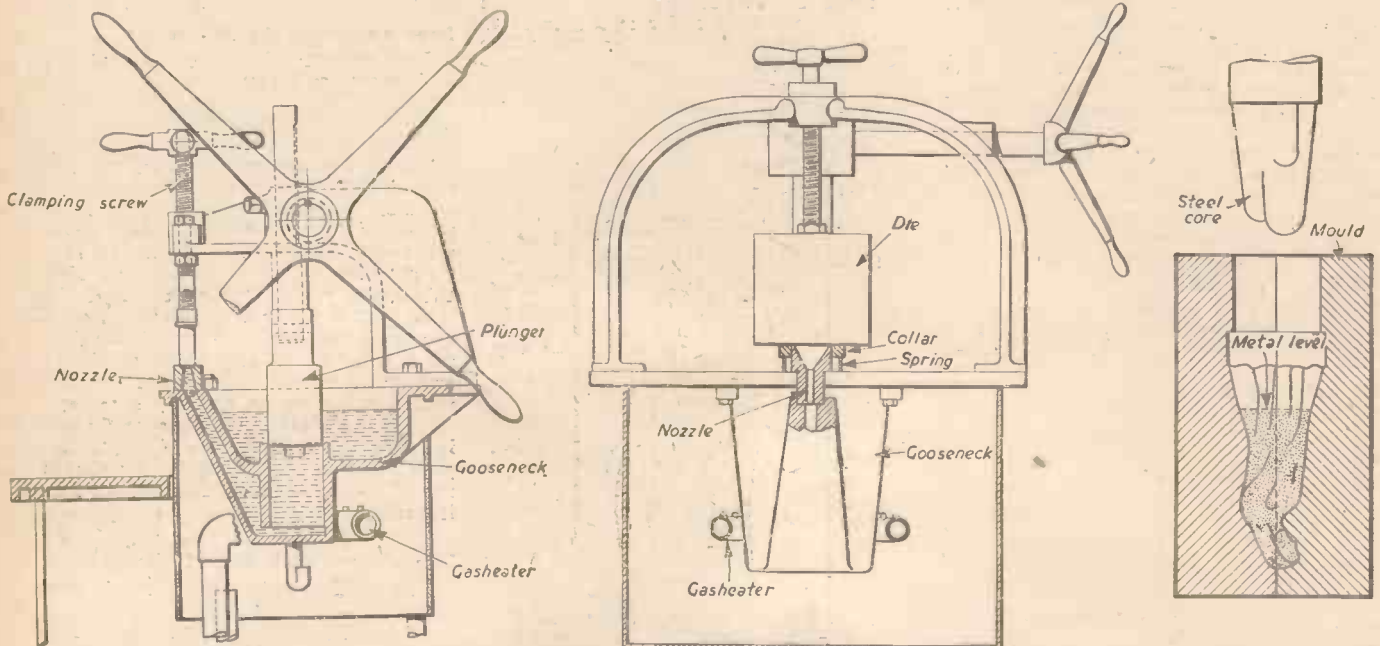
(Left)—Sectional view of Dorman hand-operated plunger type machine. Fig. 6 (Centre)—The machine as modified for slush-casting. Fig. 7 (Right)—The Cothias method of coring hollow articles after pouring.
